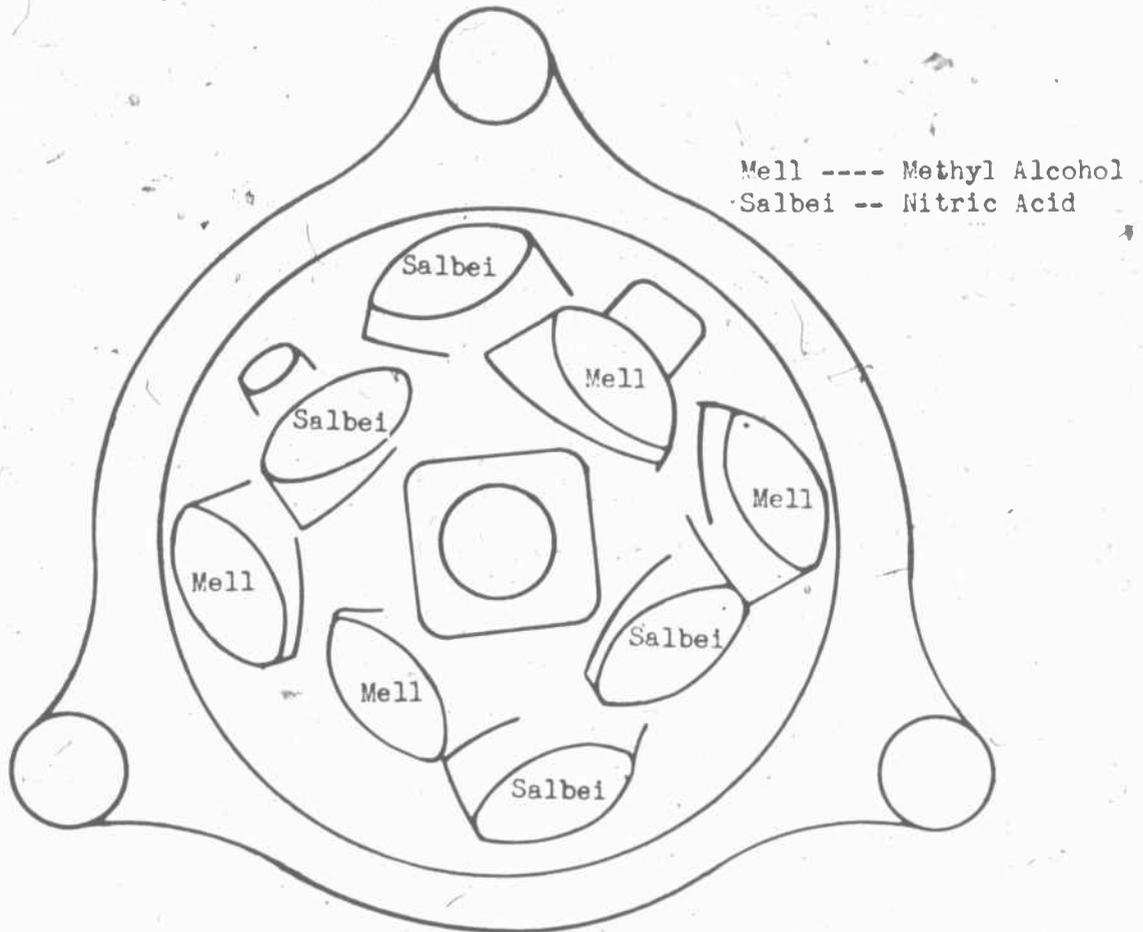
Parts of P 330A Combustion Chamber and Injectors
